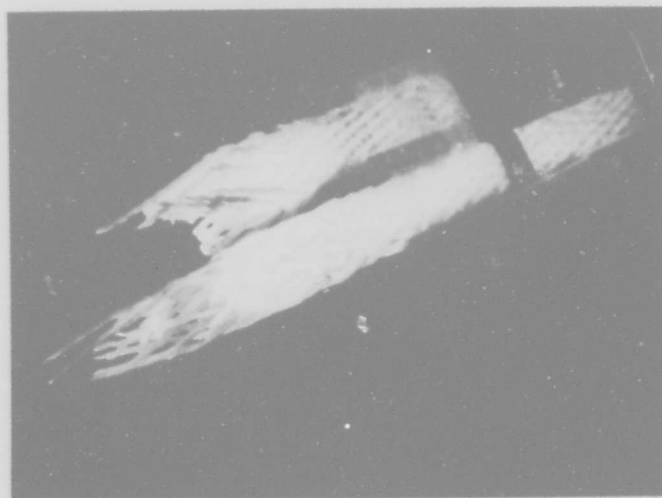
Fracture Surface of Tensile Specimen B2 from ADL-10 Panel 331-2
